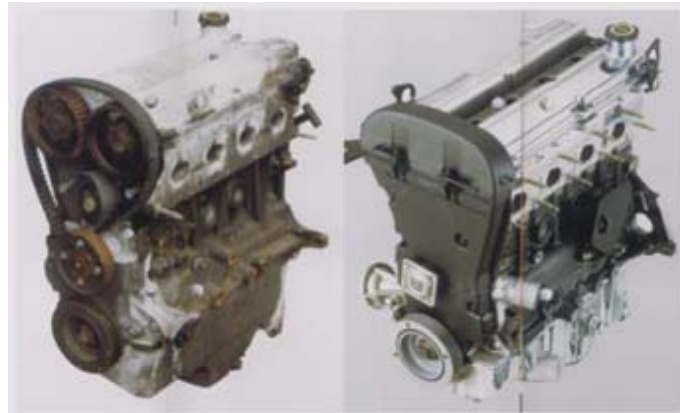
Before and after the remanufacturing of a vehicle engine block
